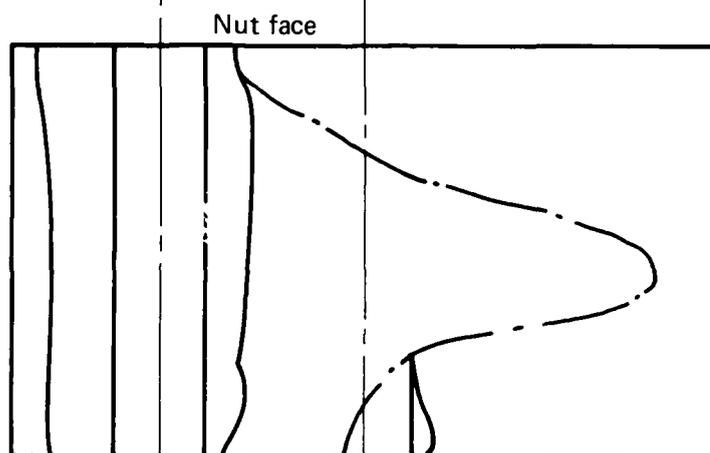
(a) FRACTURE SURFACES: SPECIMEN TYPE (C)
